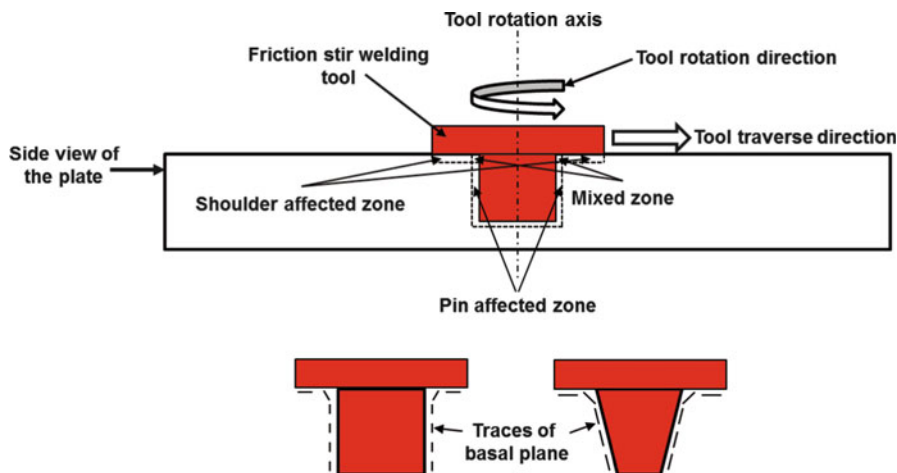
(a) Side view of friction stir welding process showing different deformation zones at weld centerline around the tool and (b) traces of basal planes in different deformation zones
